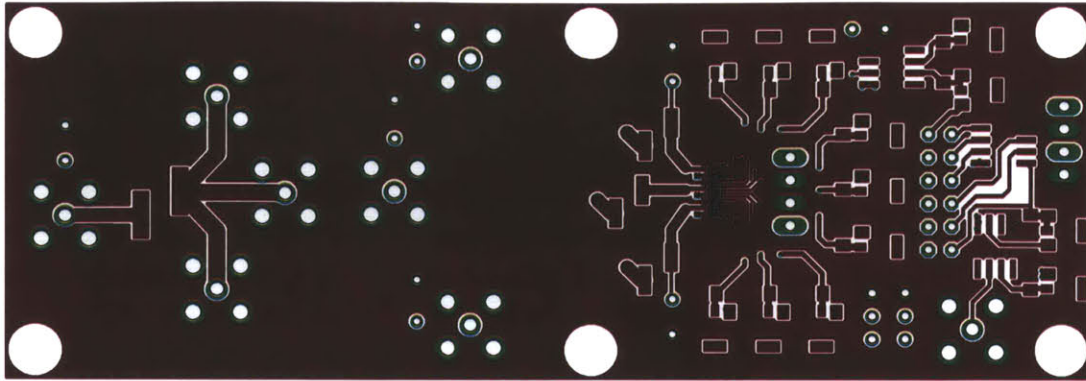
The Layer 1 PCB Layout of the Ac Power Delivery 3 Individual Full-bridge IC PCB Prototype.
